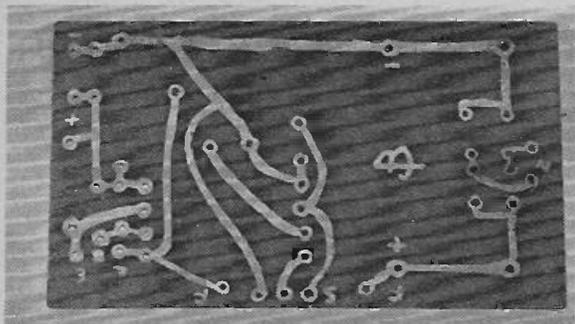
The copper laminate pattern that replaces discrete wiring between components.
